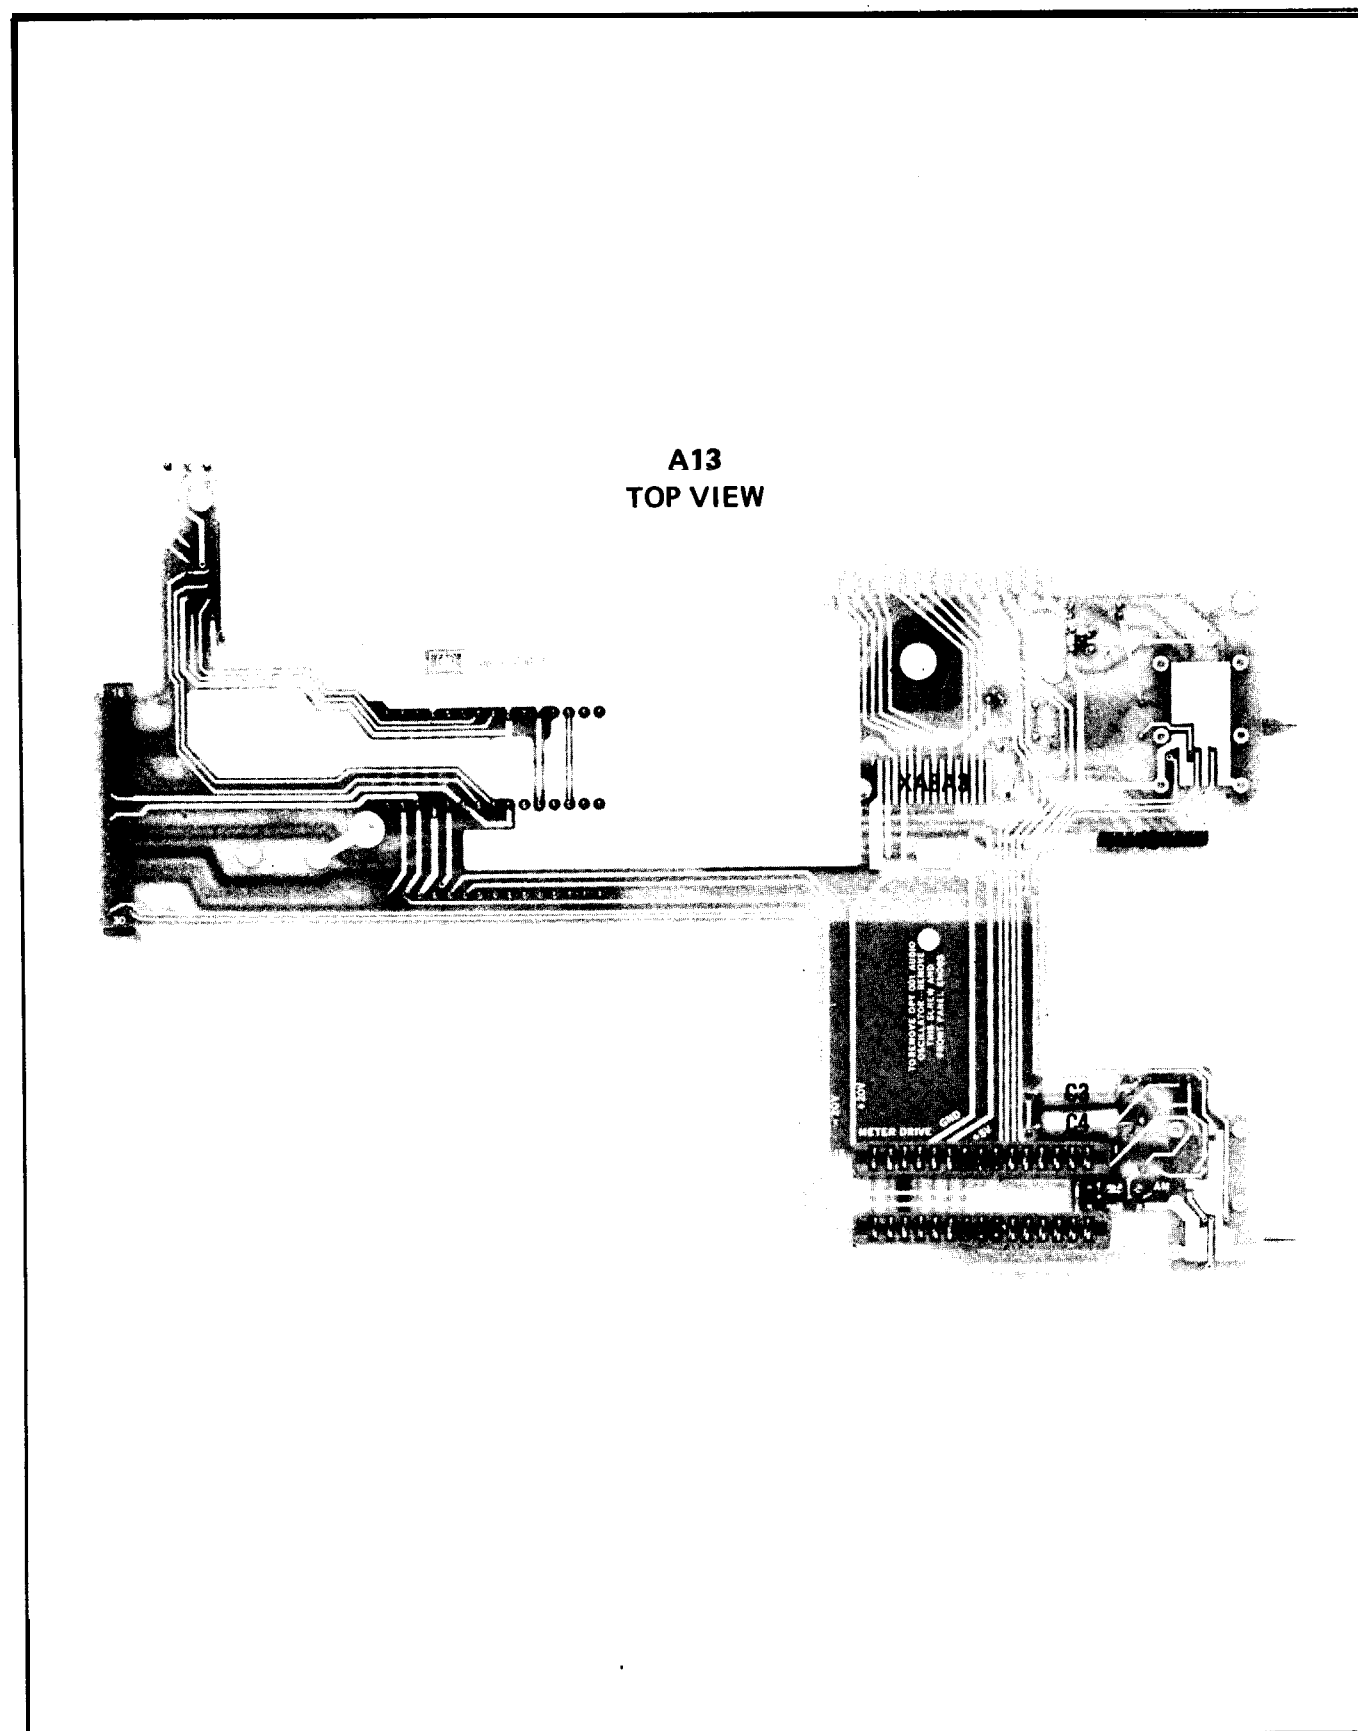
A13 Modulation/Metering Mother Board Assembly component Locations (1 of 2)
